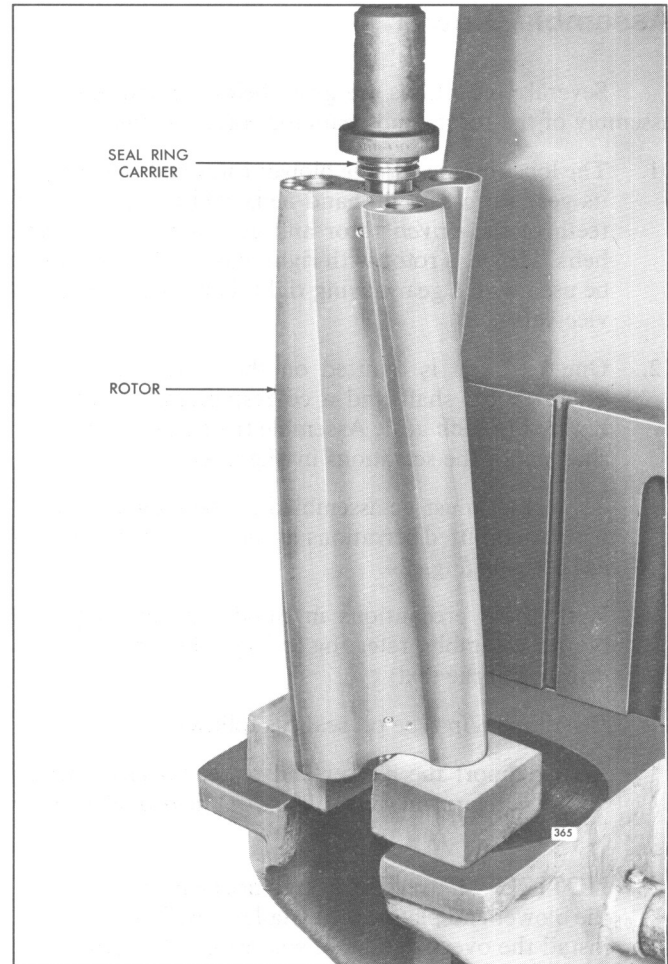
Installing Oil Seal Ring Carrier on Blower Rotor Shaft (V-92T Blowers) with Tool J 6270-4
